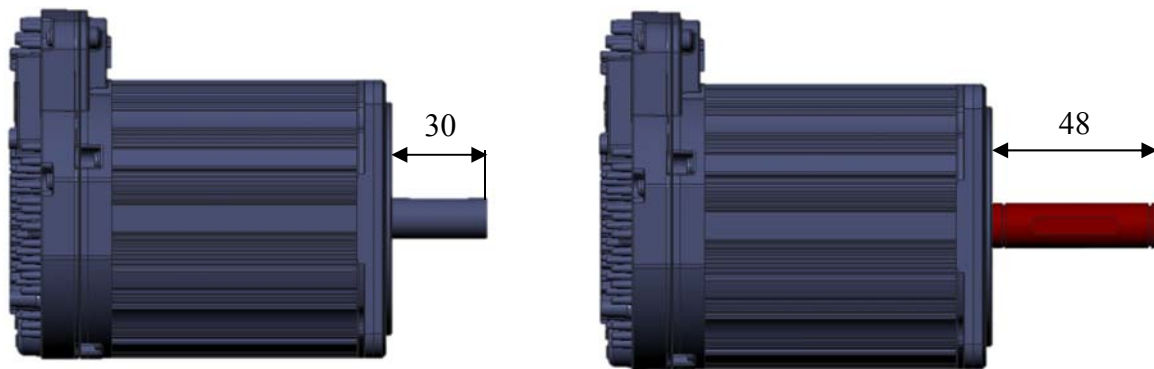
Rotary actuator modification with highlighted dimensions [mm]
